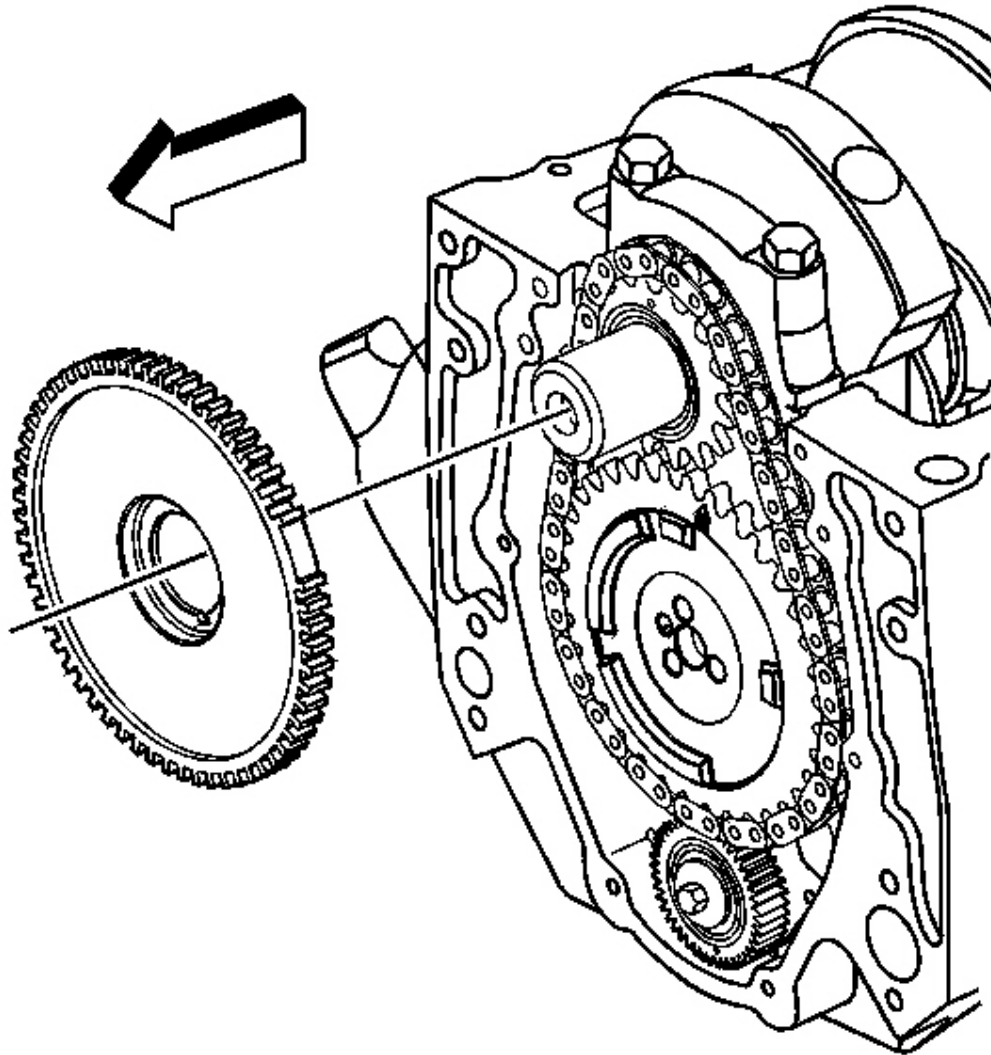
View Of Crankshaft Position Sensor Reluctor Ring
